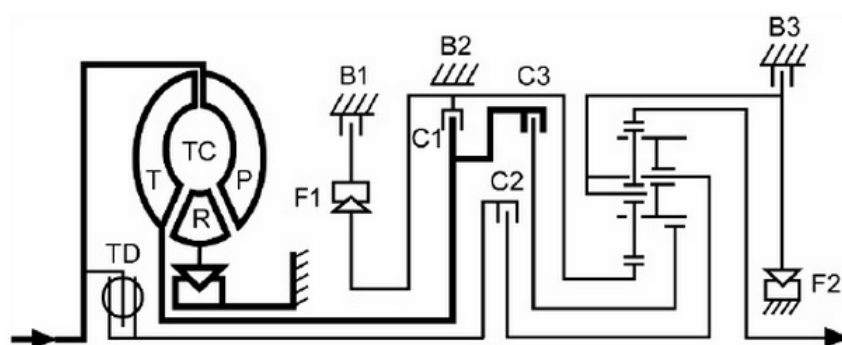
Gearbox diagram for ZF 4 HP 14 4-speed automatic transmission with Ravigneaux gear set (TC: Trilok converter, P: pump, T: turbine, R: reactor with freewheel, TD: torsion damper, F: freewheels, B: brakes, C: clutches) (Naunheimer *et al.*, 2011).
